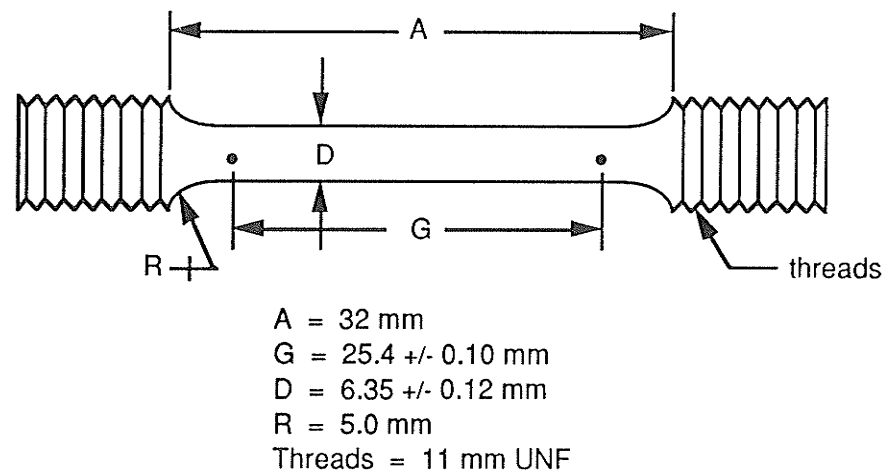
Dimensions of Cylindrical Tensile Specimen
